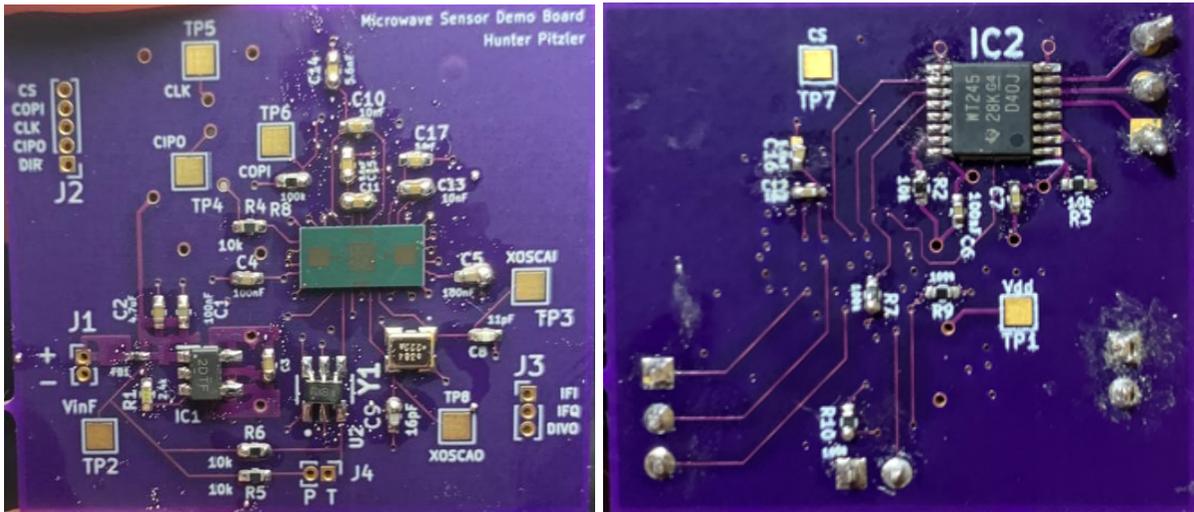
Populated Motion Sensor PCB (Front and Back)
